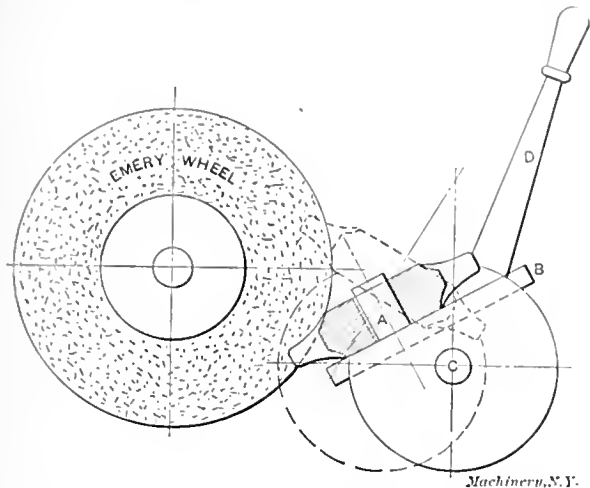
Adjustment of Table, permitting Grinding the Sides of Large Cutters
